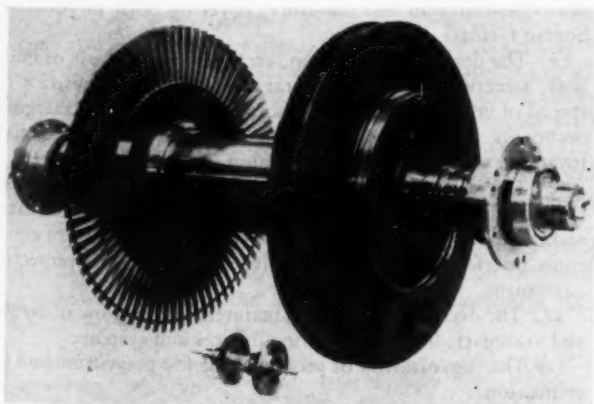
SUPERCHARGER ROTOR OF STANDARD DESIGN FOR SMALL AND VERY LARGE ENGINES
